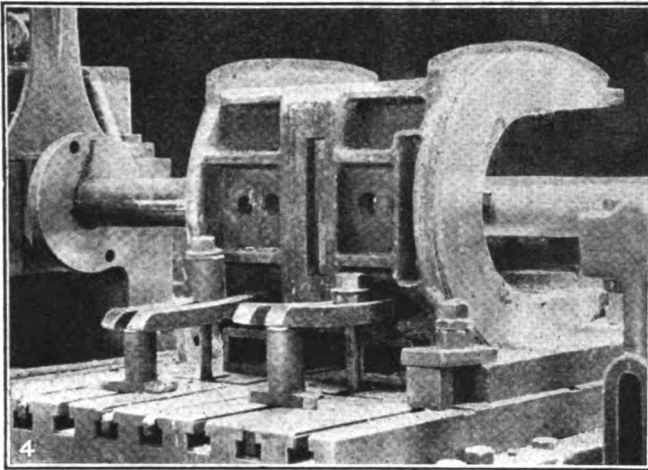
BORING A SANTA FÉ DRIVING BOX
